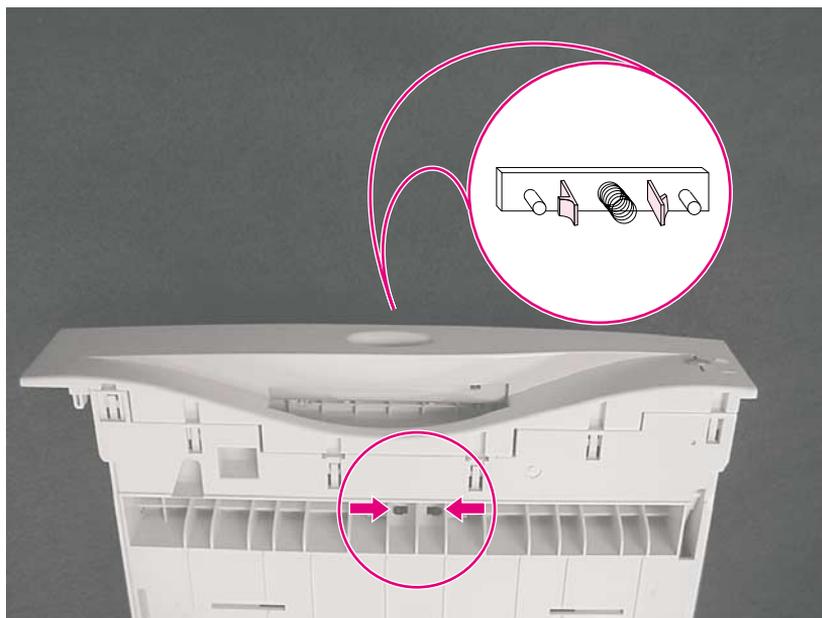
Removing the Tray 2 separation pad and spring (bottom view)
